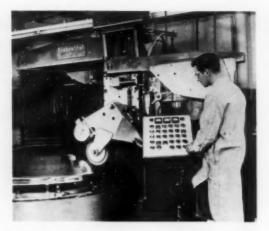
(above) Miniature bearings are magazine fed, automatically ejected, by this machine.
